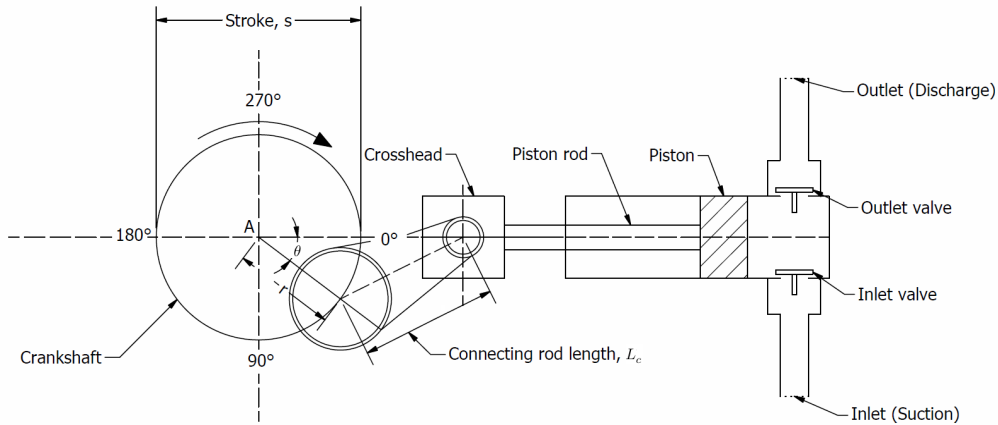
A sketch showing the geometry of one single-acting cylinder in a reciprocating pump [29].
